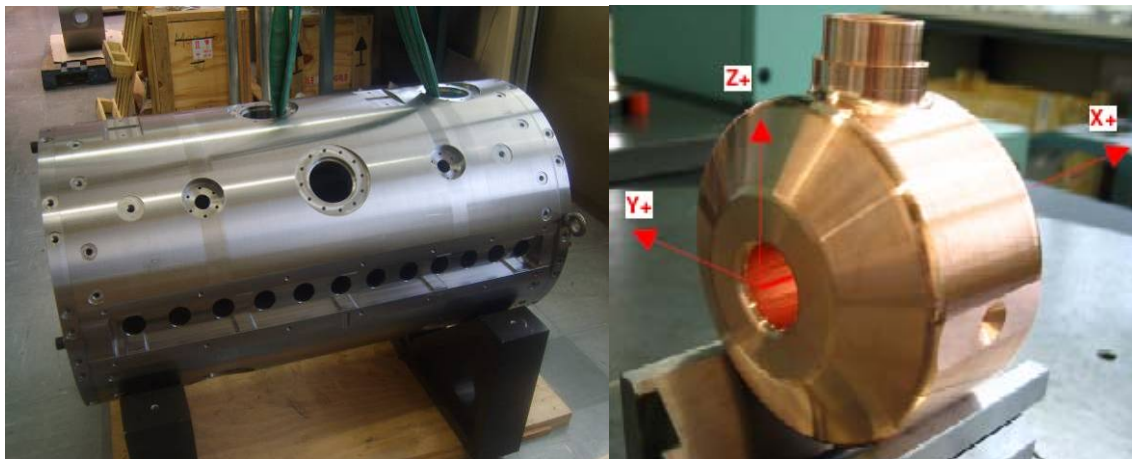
DTL prototype cavity and drift tube core after machining.
